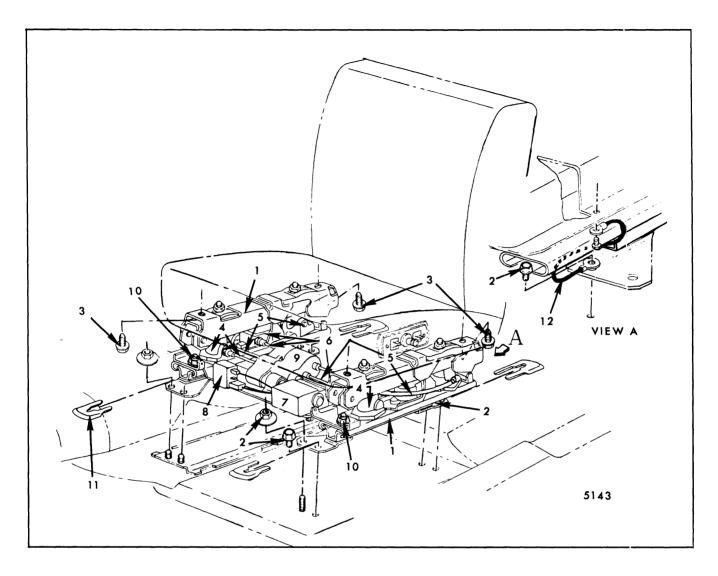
, 50-50, 40-40 and Bucket Six-Way Power Adjusters (60-40 Drivers Seat Shown - Passenger Seat, 50-50 and 40-40 Seats Typical)
